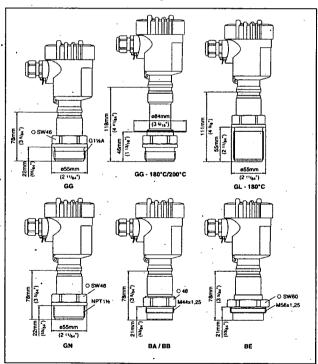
VEGABAR 65, threaded fitting: GG = G1½ A, GL = G1½ A thread length 55 mm, GN = 1½ NPT, BA/BB = M44x1.25; BE = M56x1.25
